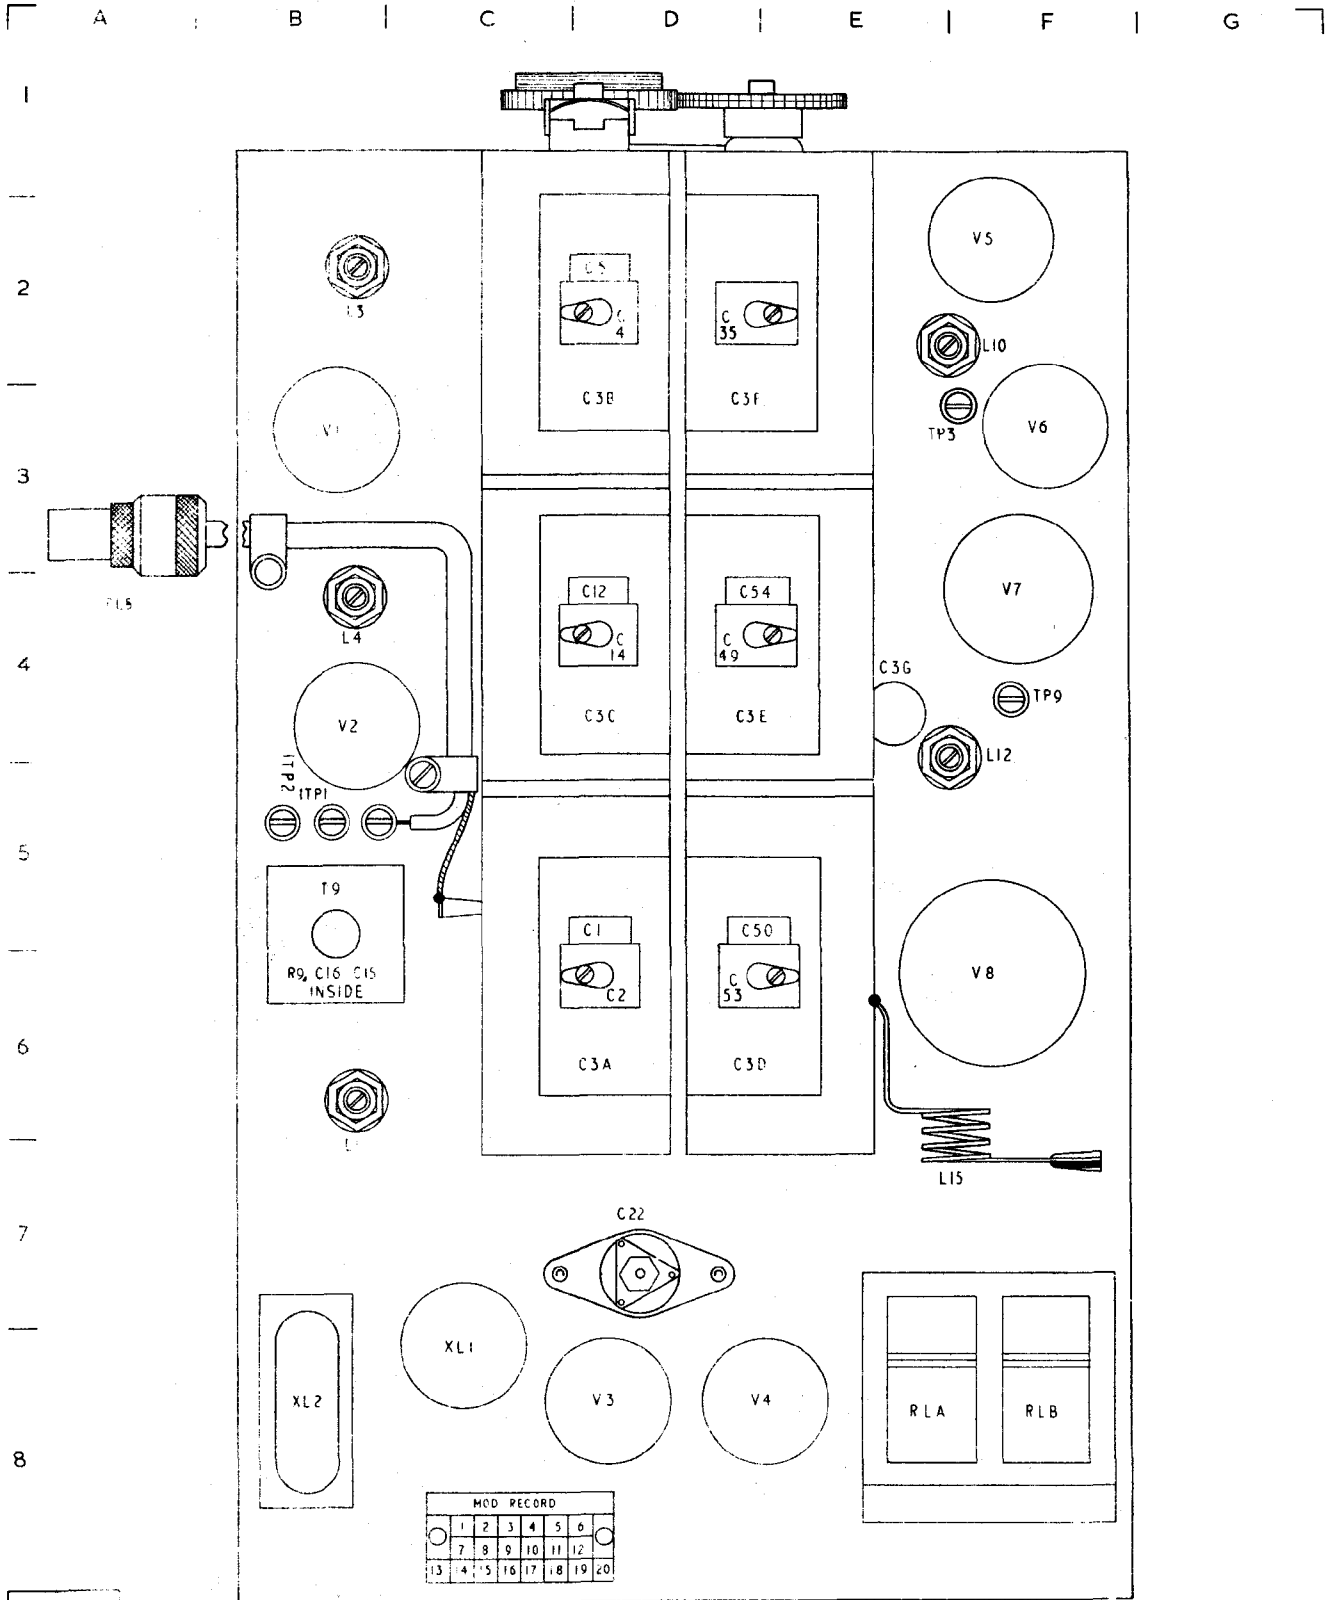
Transmitter-receiver sub-assembly, layout above chassis
